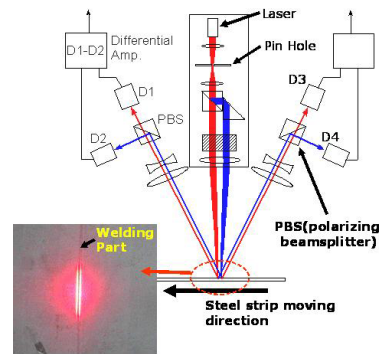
Schematic diagram of detection head for laser welding position
